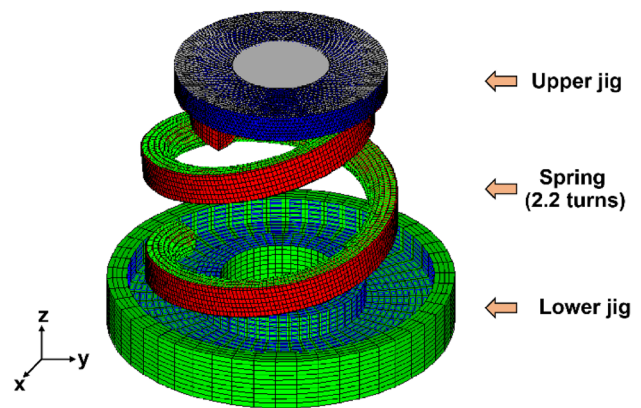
Model constructed for FEM, showing the jig for spring compression and a coil spring with a total of 2.2 turns
